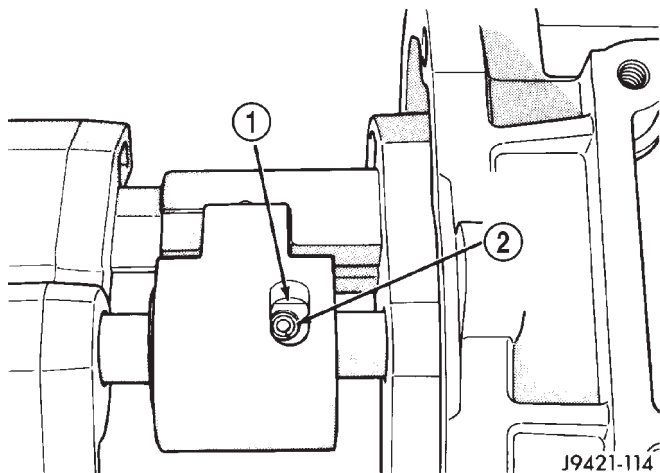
Correct Seating Of Shift Shaft Lever Roll Pin
